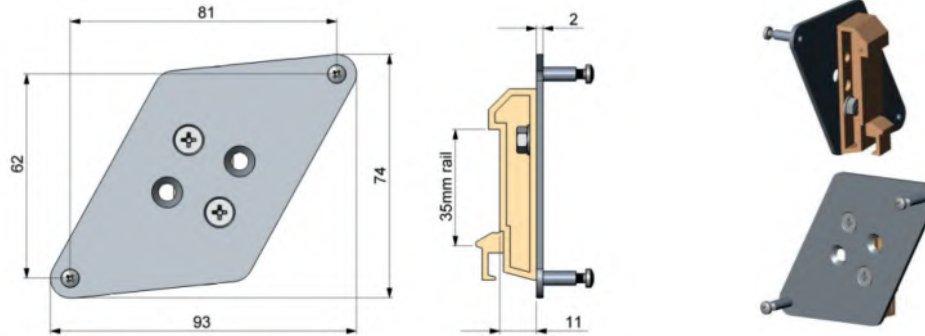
Rail mount adapter [TM-RAIL-CTL]
